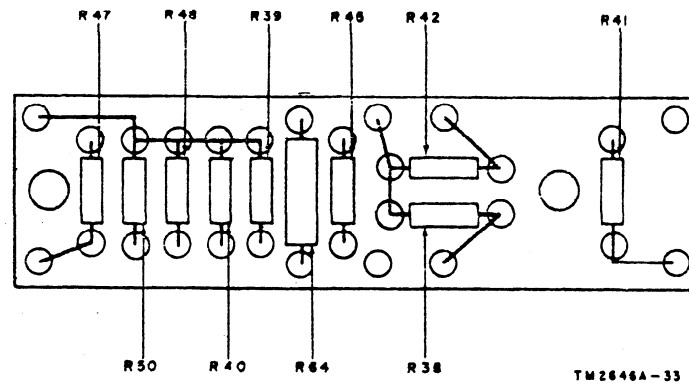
Terminal board assembly E2, bottom view, showing location of resistors.
